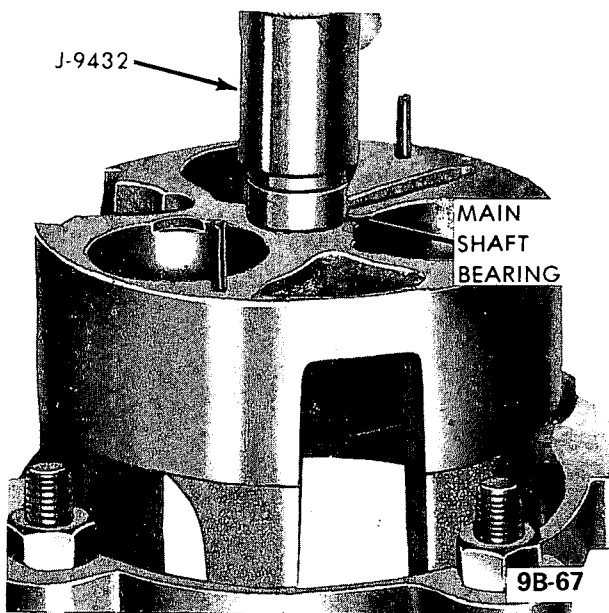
B-93 Installing Main Shaft Bearing - 6 Cylinder Compressor
